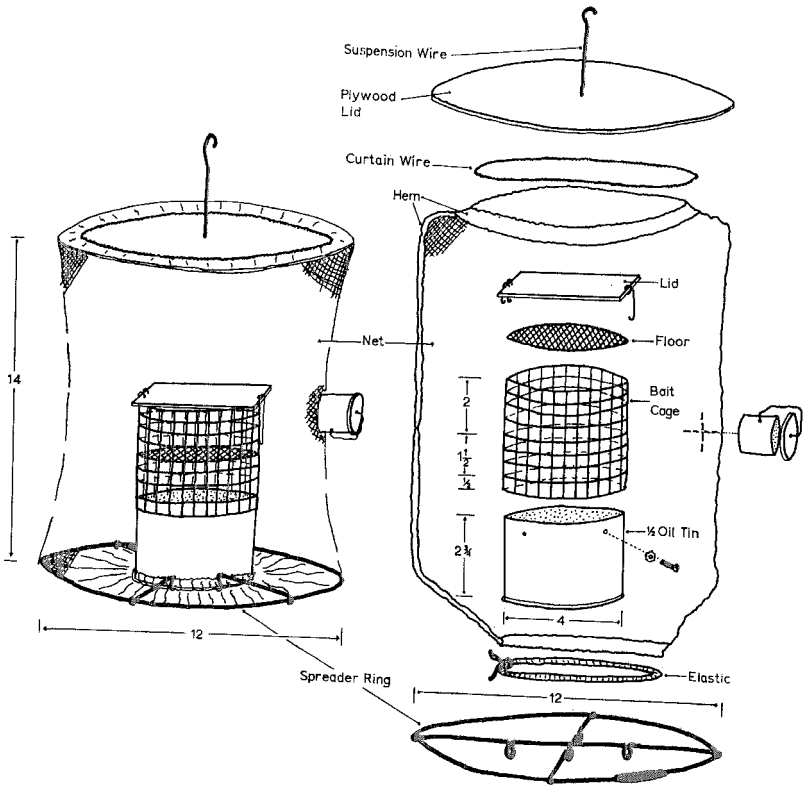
Diagram of the No. 17 Trap showing the complete trap, without bait, (left) and an exploded view of the construction details (right). All dimensions are in inches.
